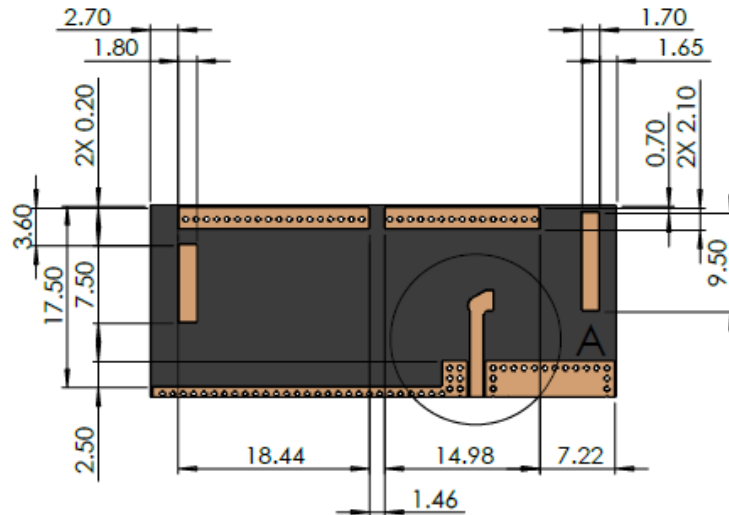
Footprint of the AC31700-01A on the top PCB layer. The main antenna has one feeding pad, 2 pads for mechanical fixation and 2 pads with vias to connect to the bottom PCB layer.
